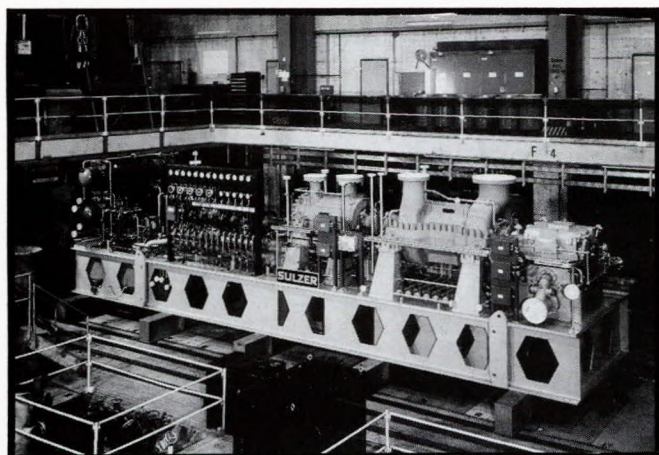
Skid-mounted compressor set with low-pressure and high-pressure compressor, gearbox and integrated seal oil system. This is a compact but accessible lightweight skid.
